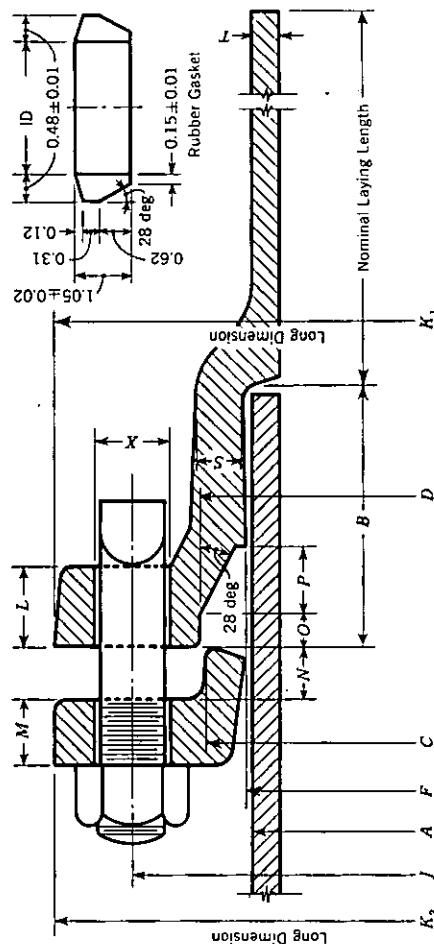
Standard Mechanical-Joint Dimensions (see Table 12-1)
